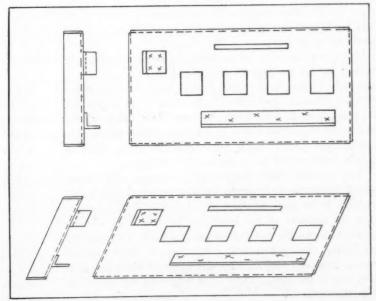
Top view shows orthographic drawing of part which fits in the plan plane of an assembly. Lower view shows same drawing after it has been converted into a trimetric projection by being photographed at proper angle on the machine pictured in Fig. 1
